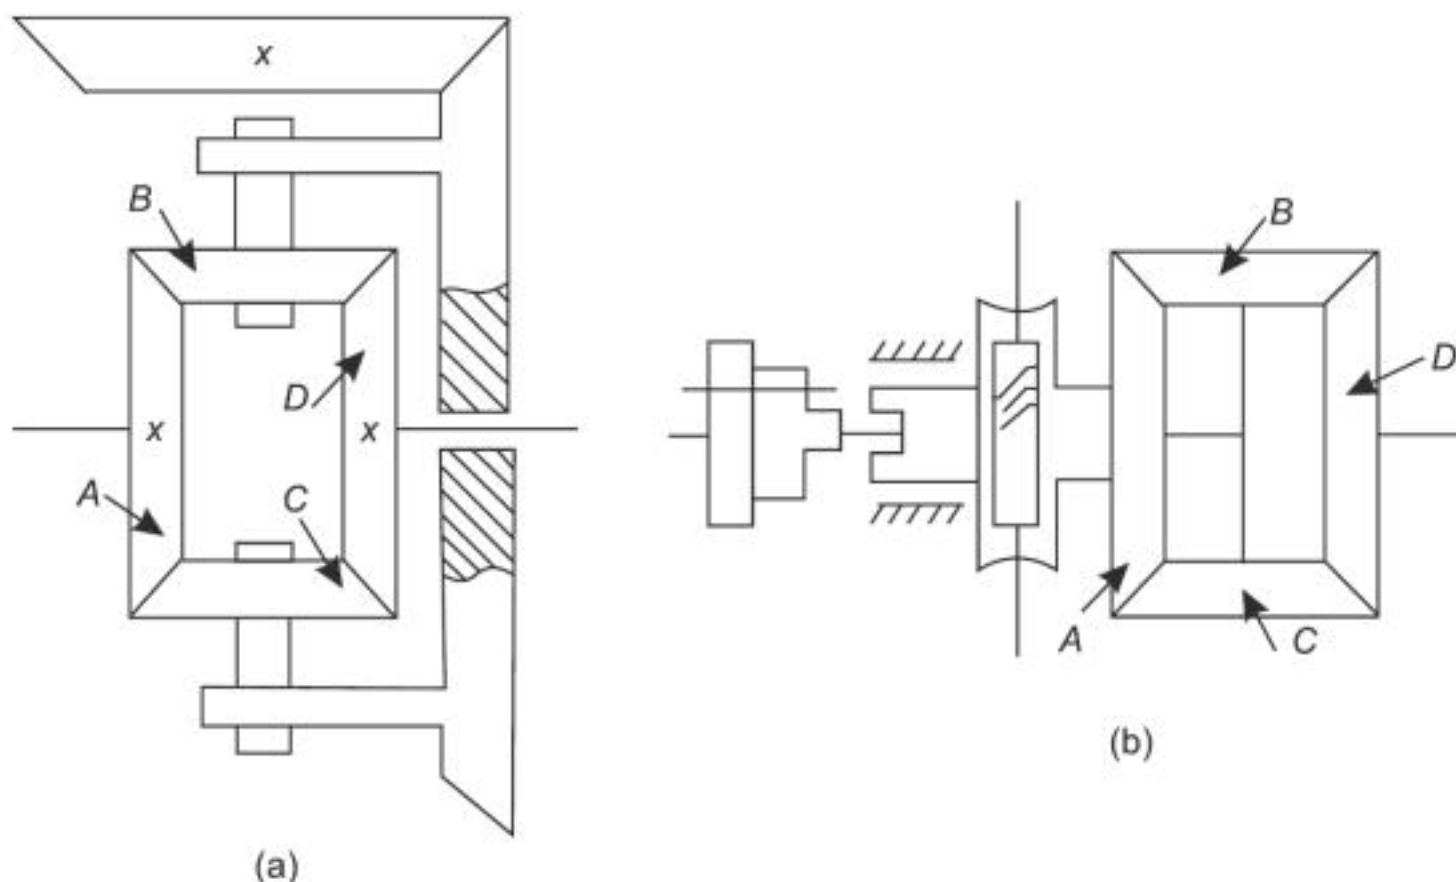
Differential mechanisms: (a) used in automobiles (b) used in machine tools
